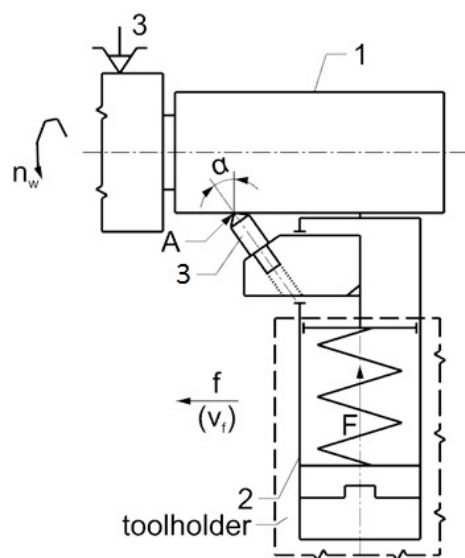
A schematic diagram of sliding friction burnishing (1—workpiece, 2—burnishing tool, 3—burnishing insert, A—active element of tip).
